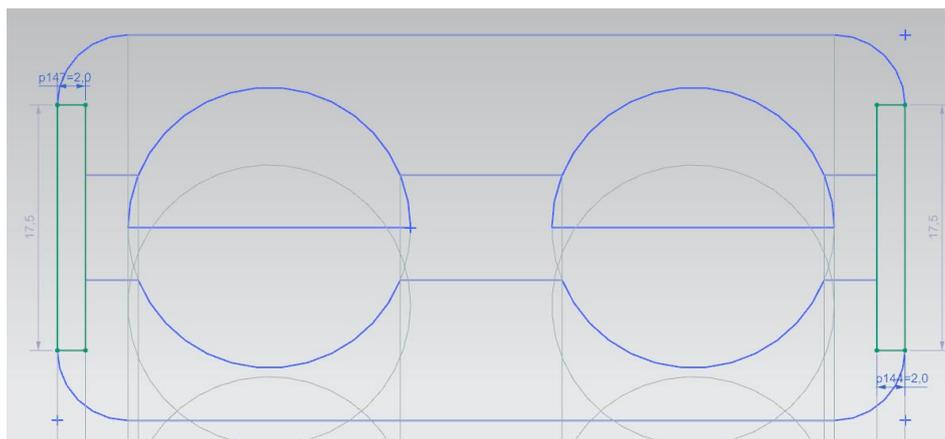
Rectangles sketch for designing the cover of the ball bearings [Own Source]
